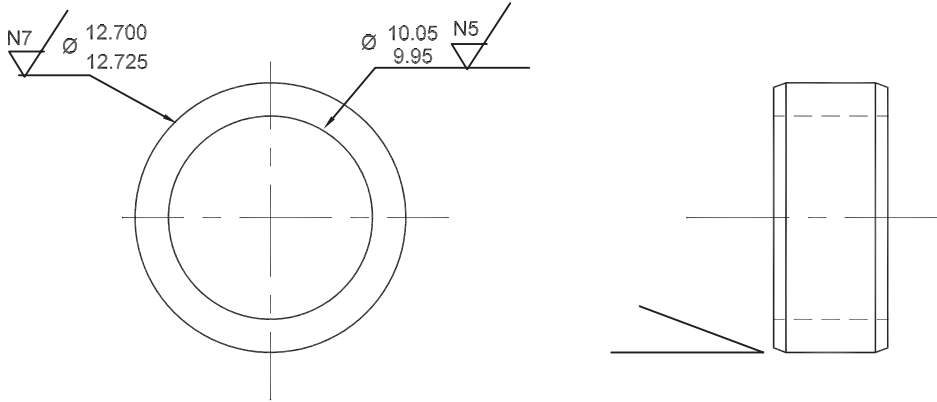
Loading Pin and Grip Assembly for the Superpave Direct Tension Test
